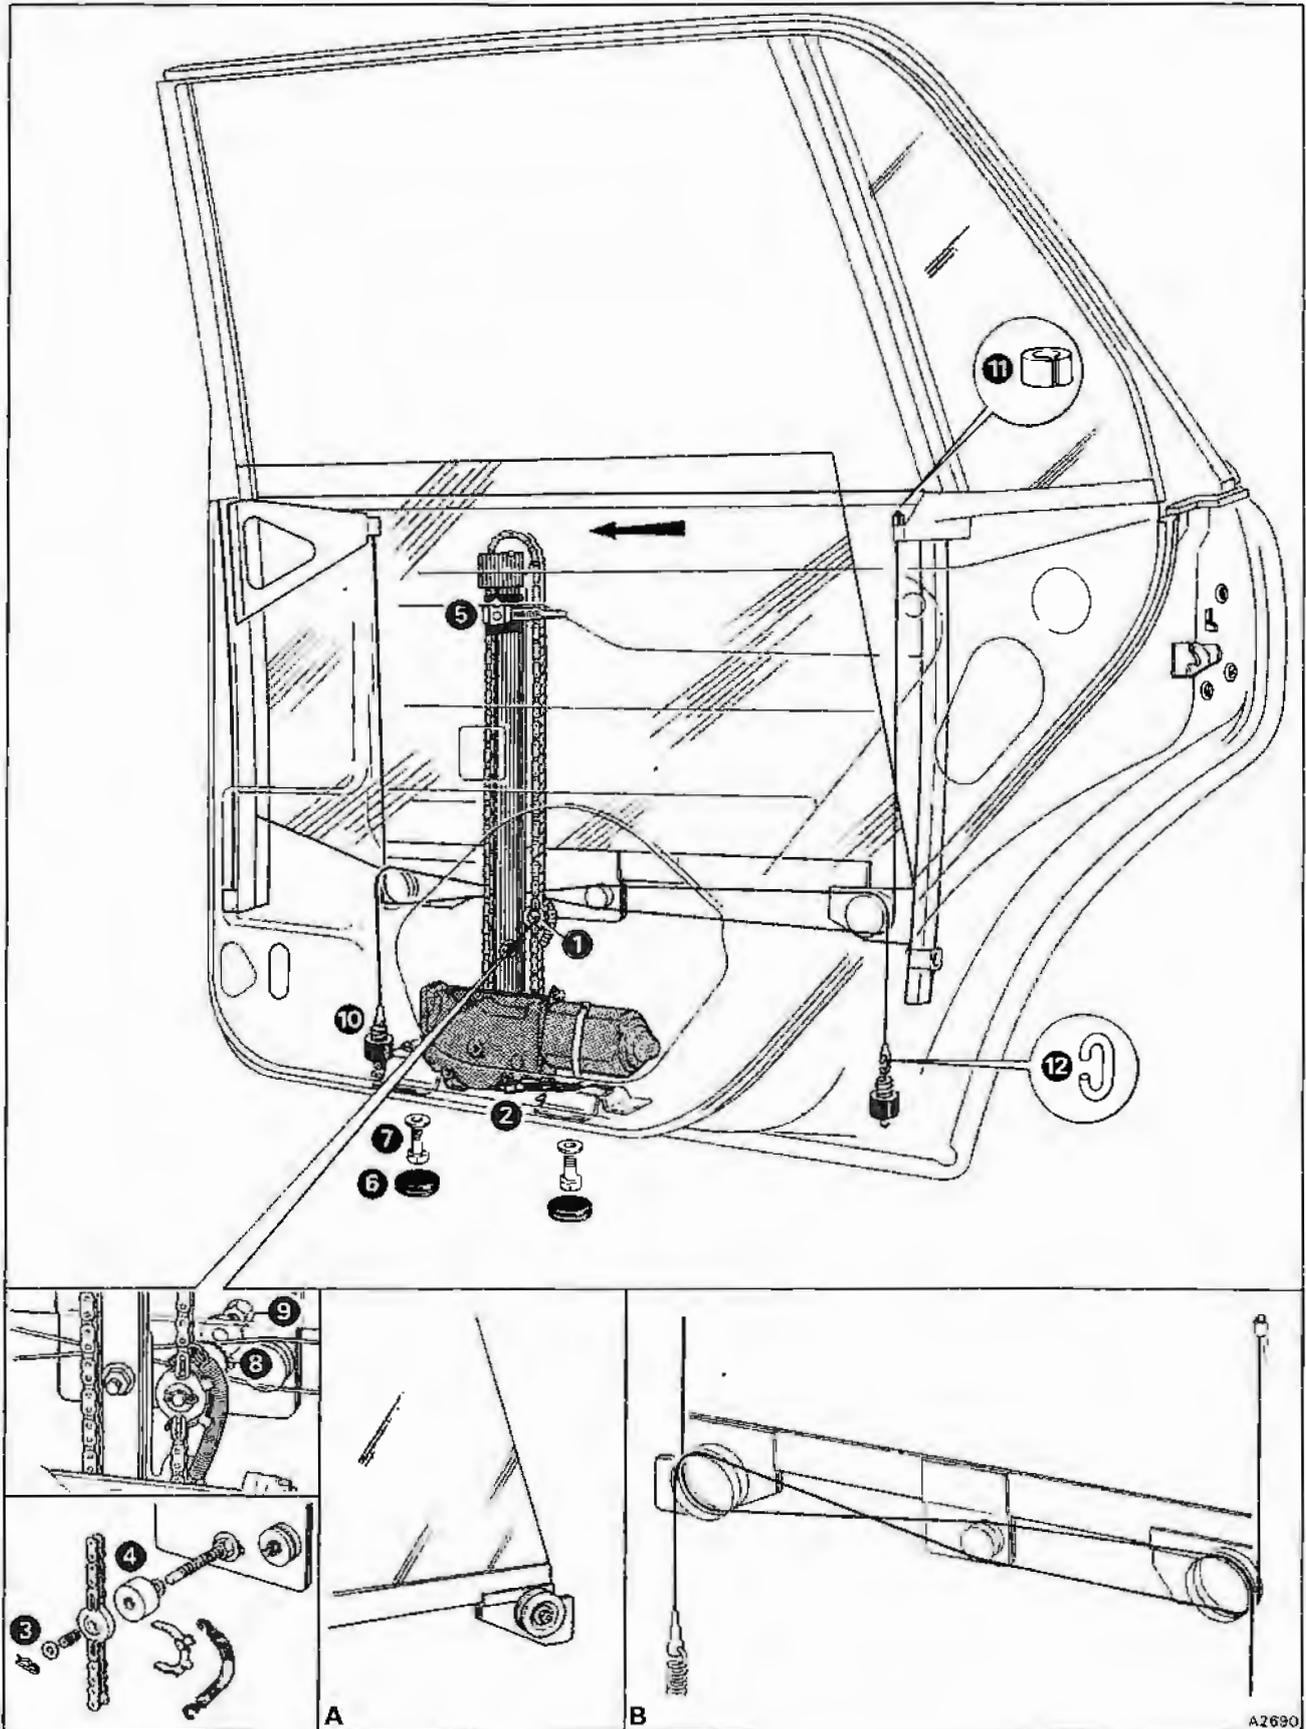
Window lift mechanism, door glass, and wire guidance assembly and fittings
